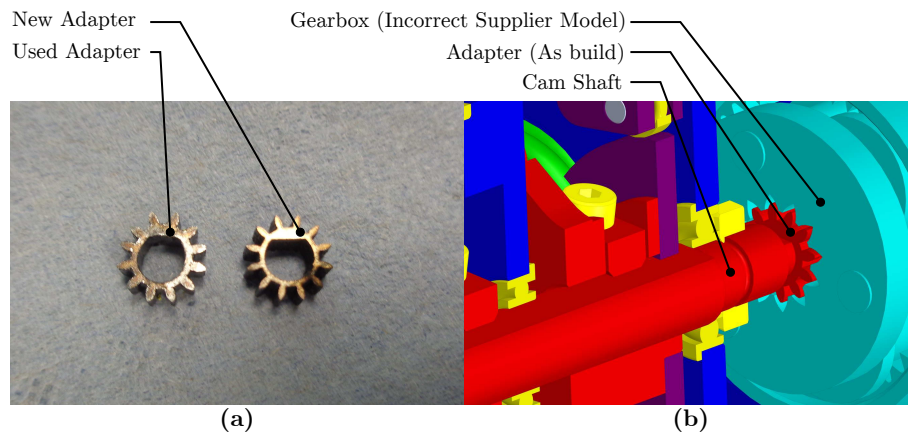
Issue with gearbox adapter. a: A used gearbox adapter shows plastic deformation with respect to an unused gearbox adapter. This allows play between the cam shaft and gearbox output. b: The actual adapter that fits in the actual gearbox is smaller and has a much thinner wall than the first one that was designed based on the incorrect CAD-model of the gearbox supplier.
